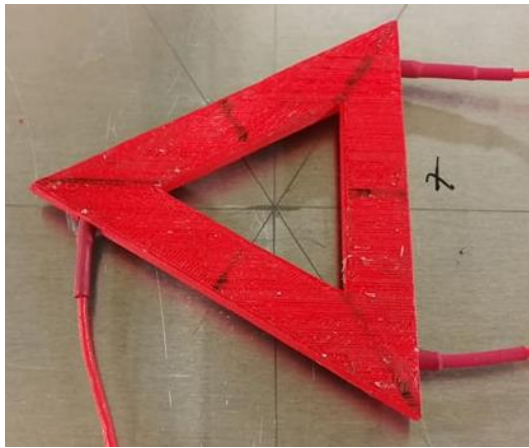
3D printed spacer used to ensure regular sensor bonding
